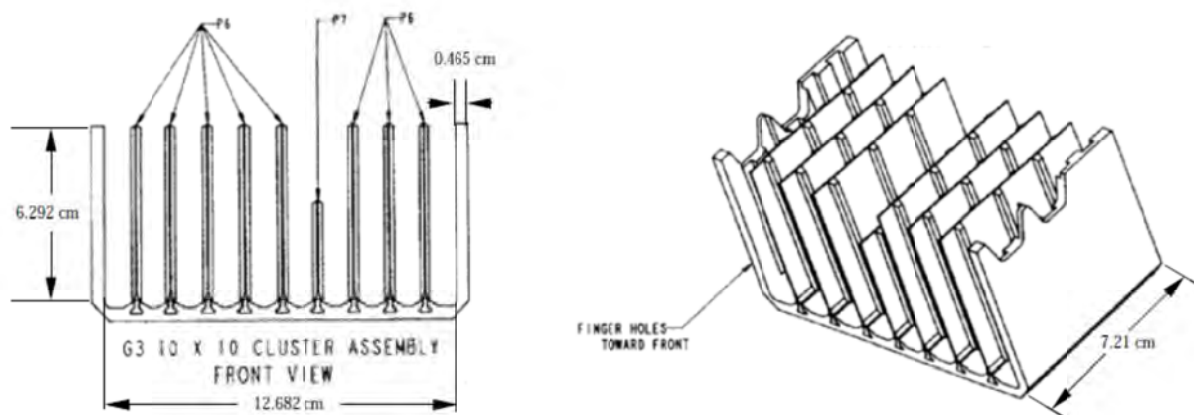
Polyethylene Cluster Separator Assembly (GNF Design)
